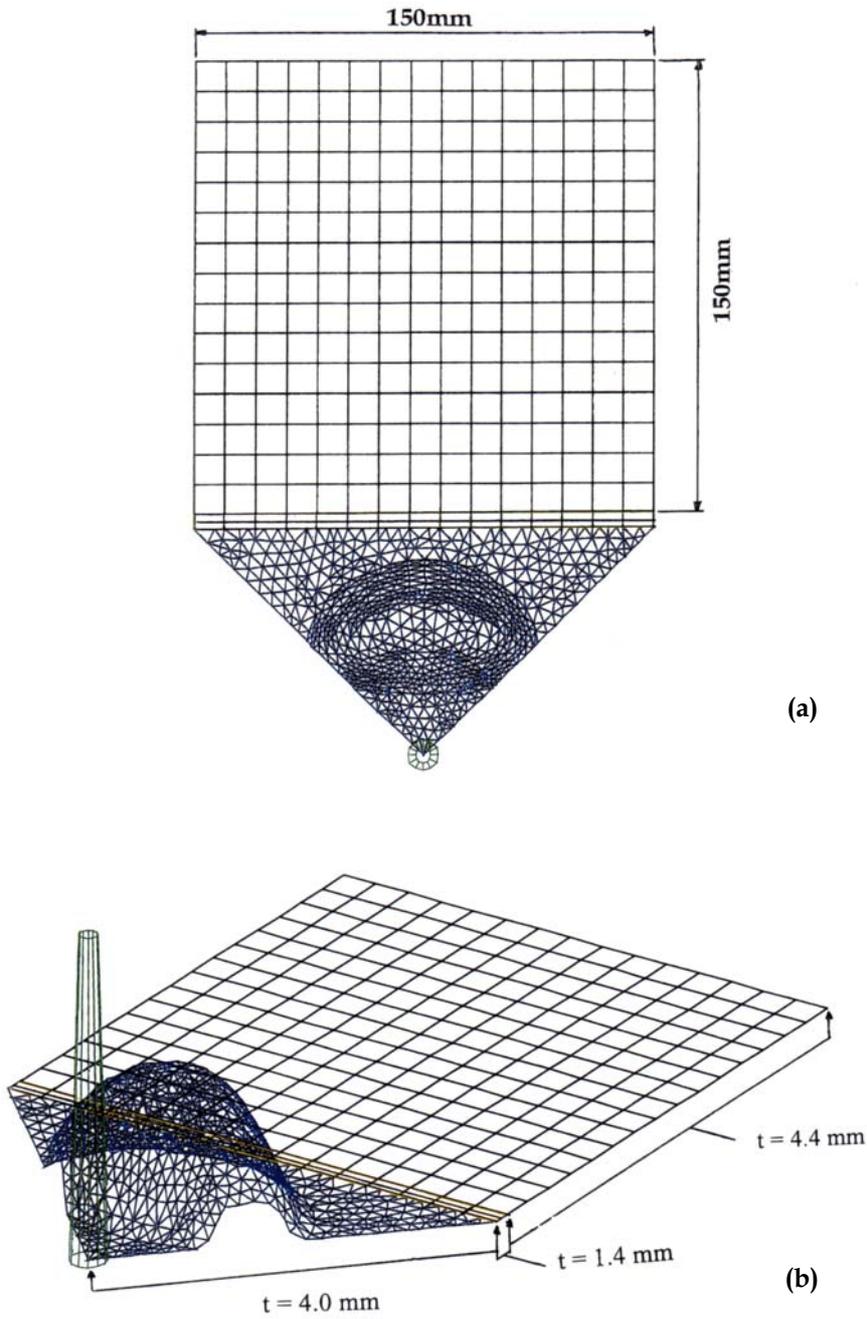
Design and dimensions of moulding cavity; (a) in-plane and (b) thickness.
